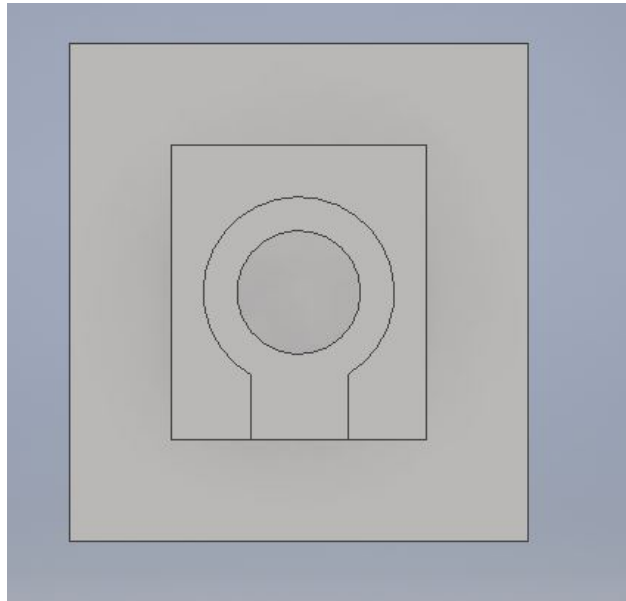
Top view of printed holder system's bottom section. Copper creep tubes will be placed in the smaller hole section and the sensor would be placed on the larger circle region.
